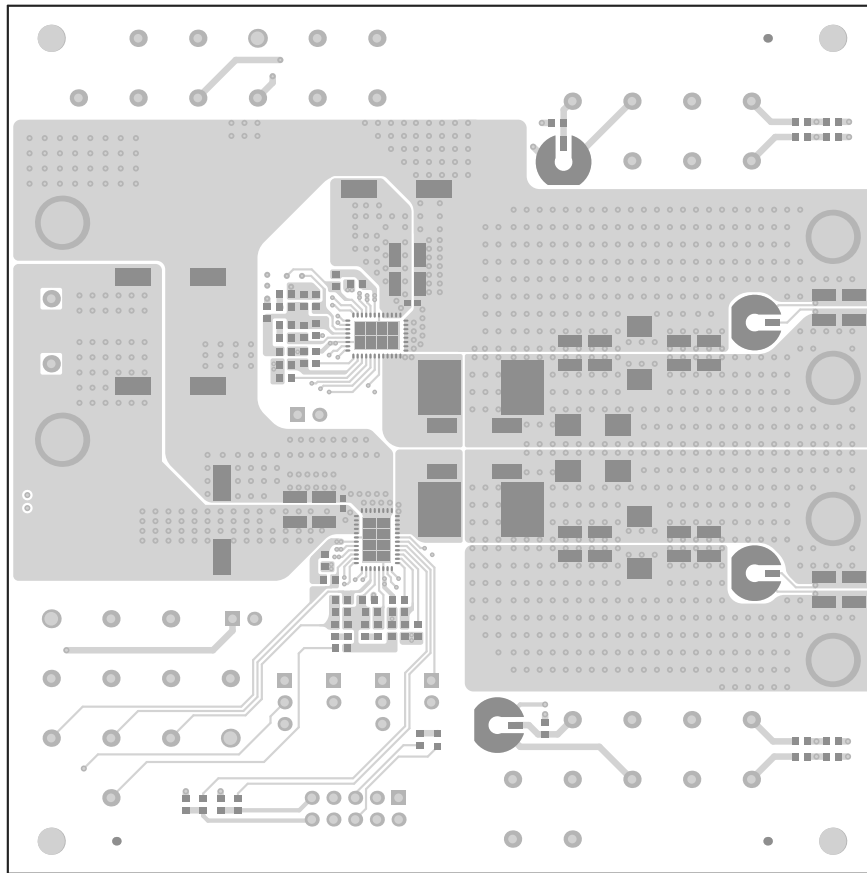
TPS546C23EVM2-746 EVM Top Copper (Top View)
